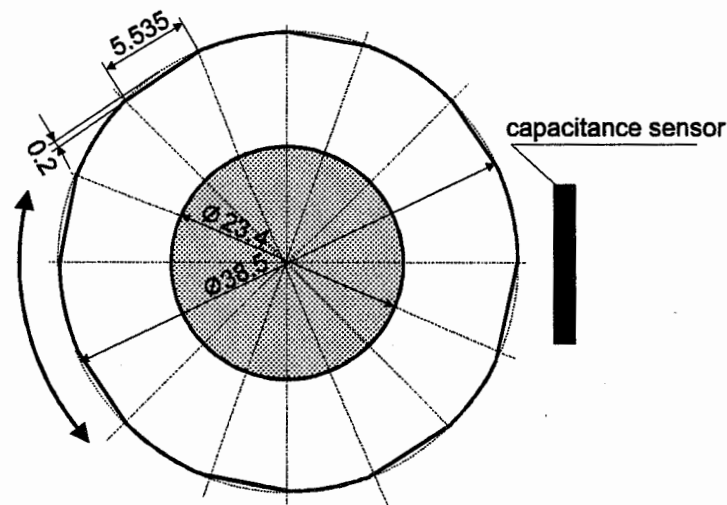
Cross section of the specially designed rotor shaft for the sensor bandwidth test[unit : mm]
